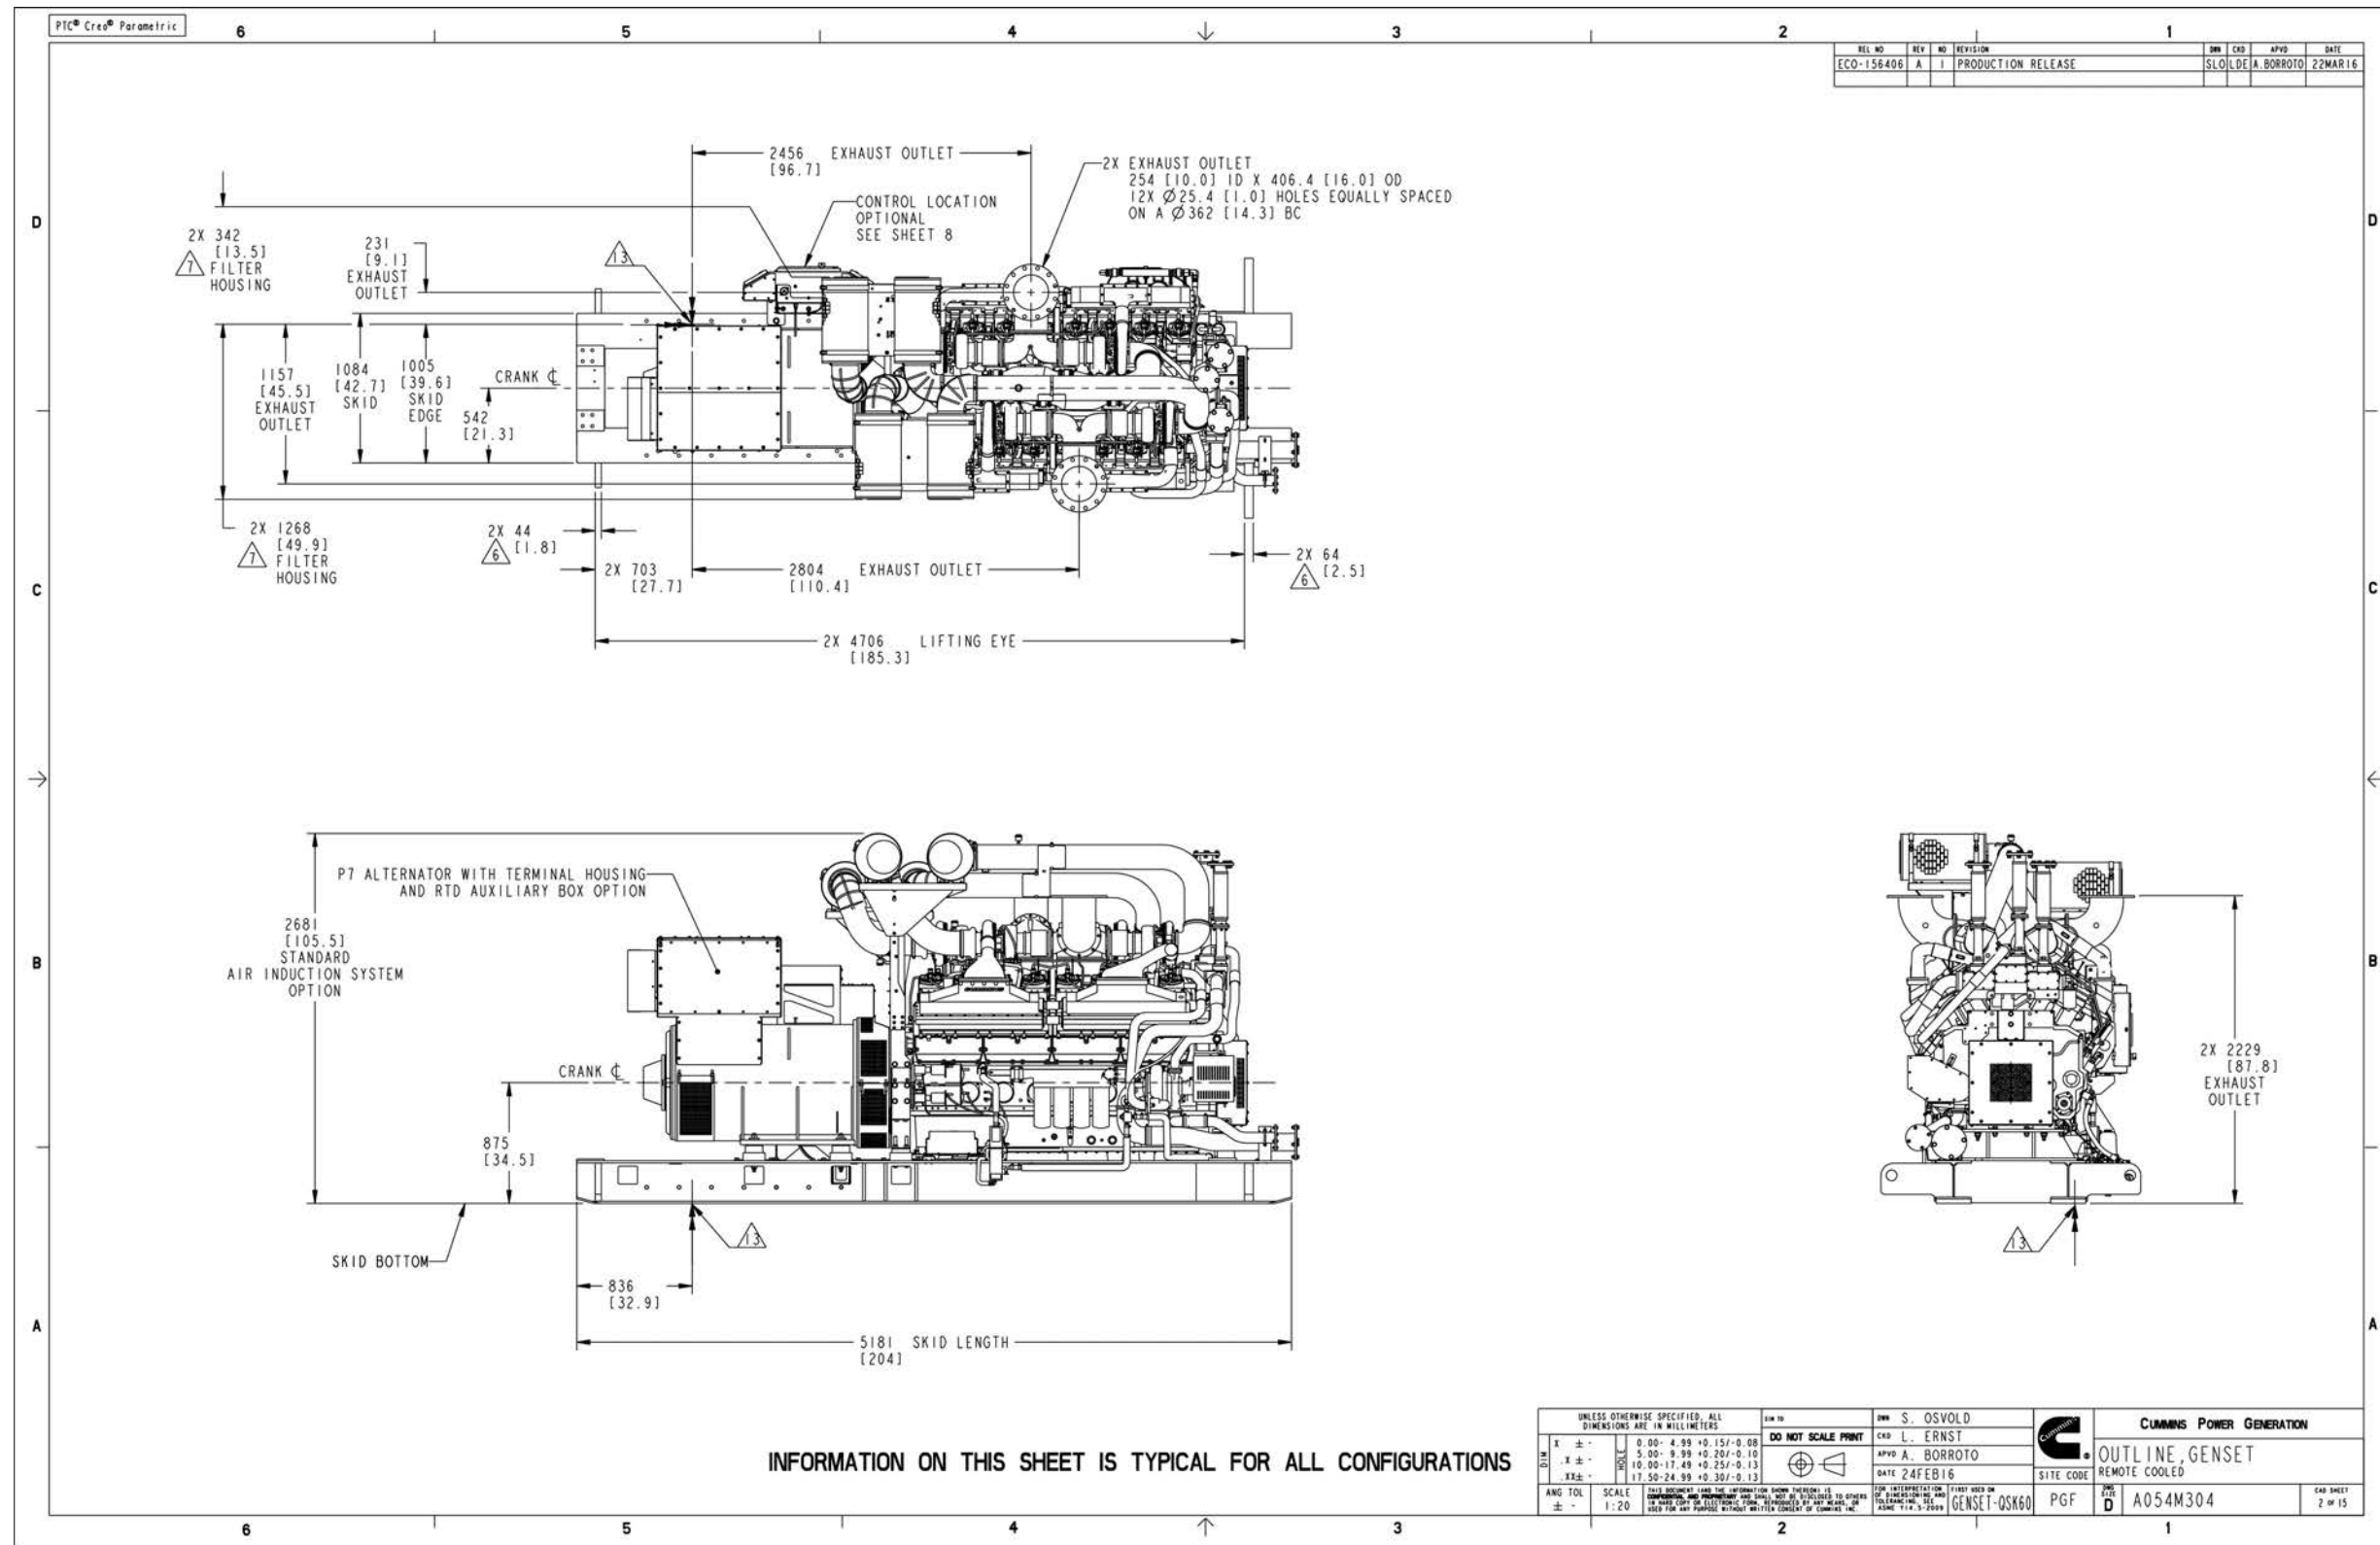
GENERATOR SET WITH REMOTE COOLING OUTLINE DRAWING (SHEET 2)
